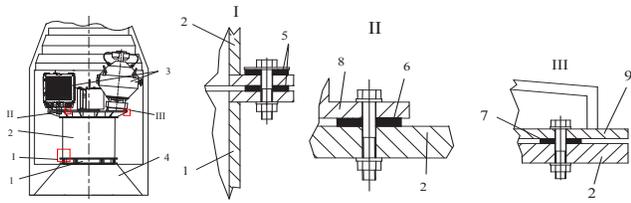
Shock Absorbers Installed in the Cylindrical Adapter Joints 1 – LV attachment ring; 2 – adapter casing; 3 – SSV; 4 - LV; 5,6,7 – rubber shock absorbers incorporated into the LV attachment rings or mounted at the SSV installation sites; 8,9 – SSV attachments.
